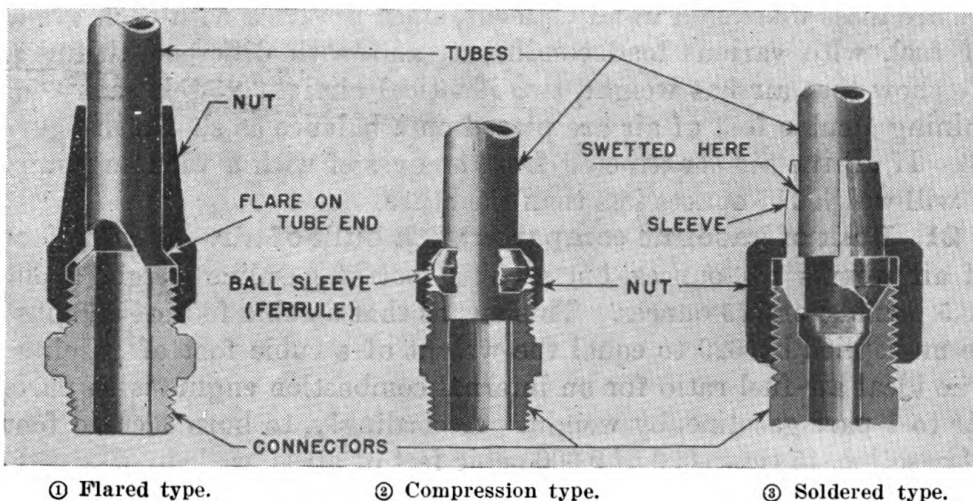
Three types of tube fittings used on fuel and oil lines.
